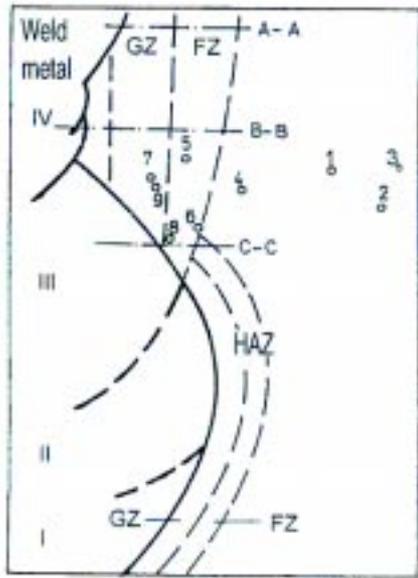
Crack tip locations for specimens 1 to 9 in different HAZ regions of individual welding runs (I to IV) in the welded joint of steel B (compare Table 6)
